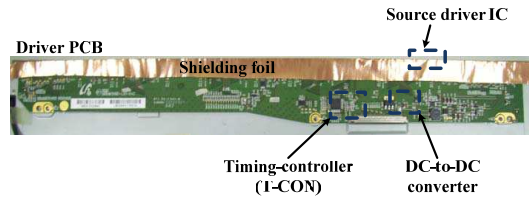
Use of shielding in the driver PCB to reduce the radiated emission from TFT-LCD panel.
